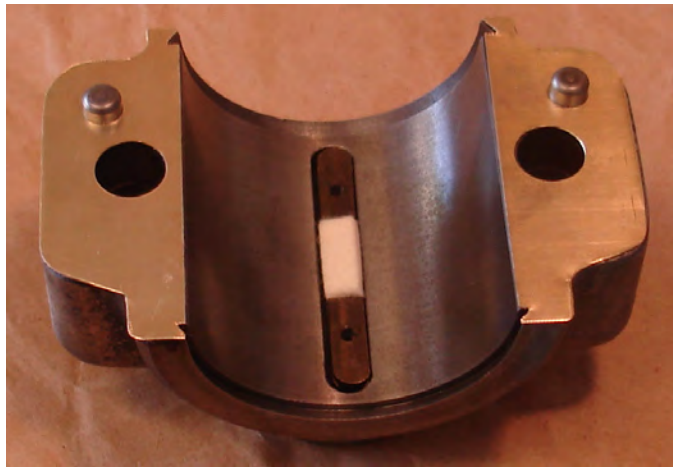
Refurbished front bearing cap with new expander felt and shims.
